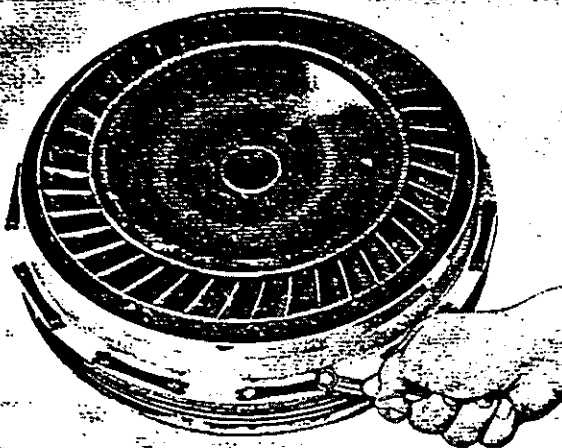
Removing Second Stage Power Turbine Sealing Flange Bolts
